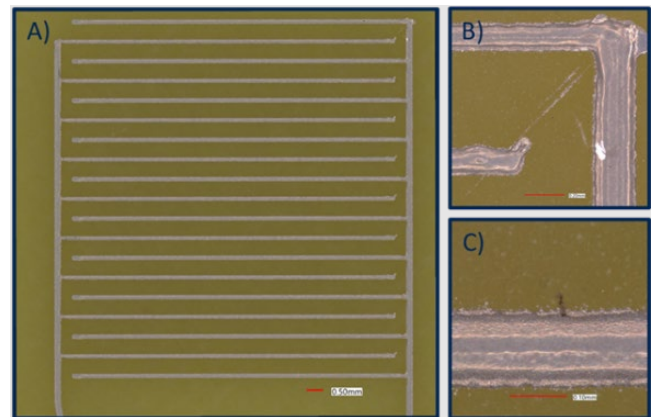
Striking defect observed on printed test structure 042-PAD-4 of Figure 7 due to printing parameters.
